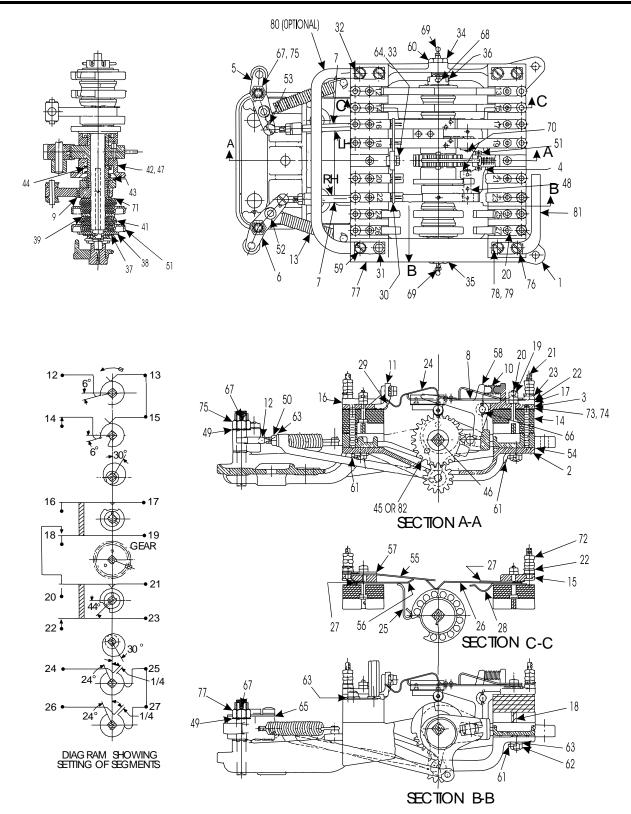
M-3, M-23A, and M-23B IPD Switch Machine Circuit Controller Parts Location
